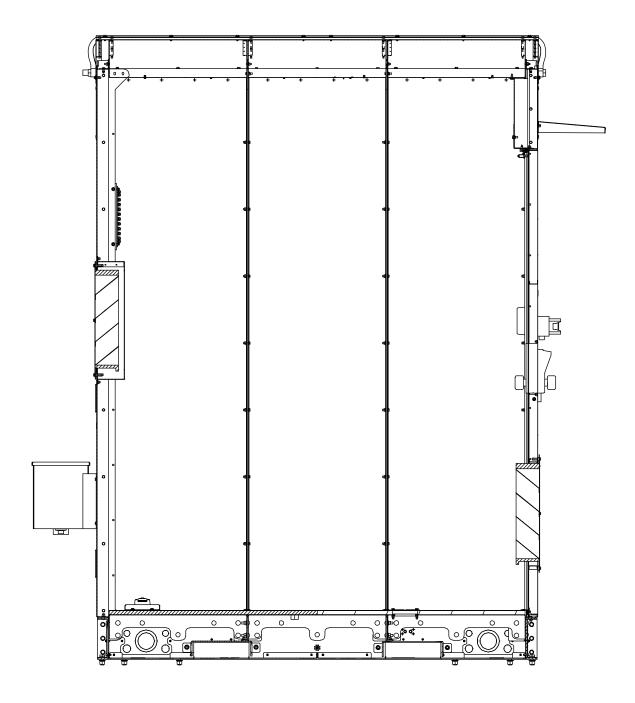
Top View of Floor and Floor Cable Entry Ports
